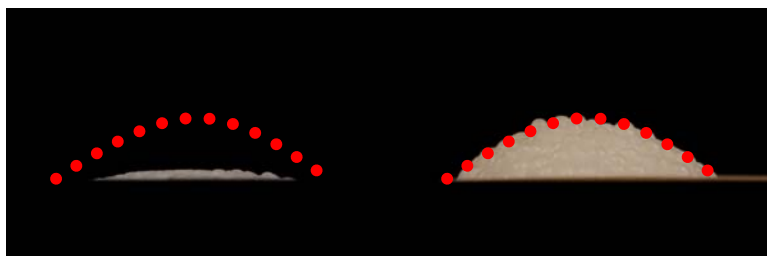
Photographs of printed dome constructs. (Left) Open-Loop. (Right) Local-GGF.
